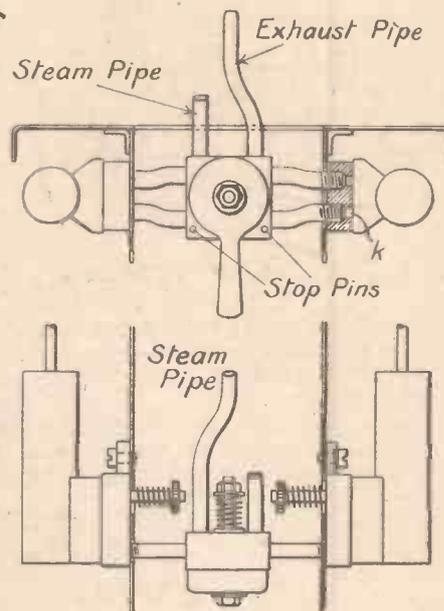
Elevation and plan of a reversing arrangement fitted to a double-cylinder model engine.
